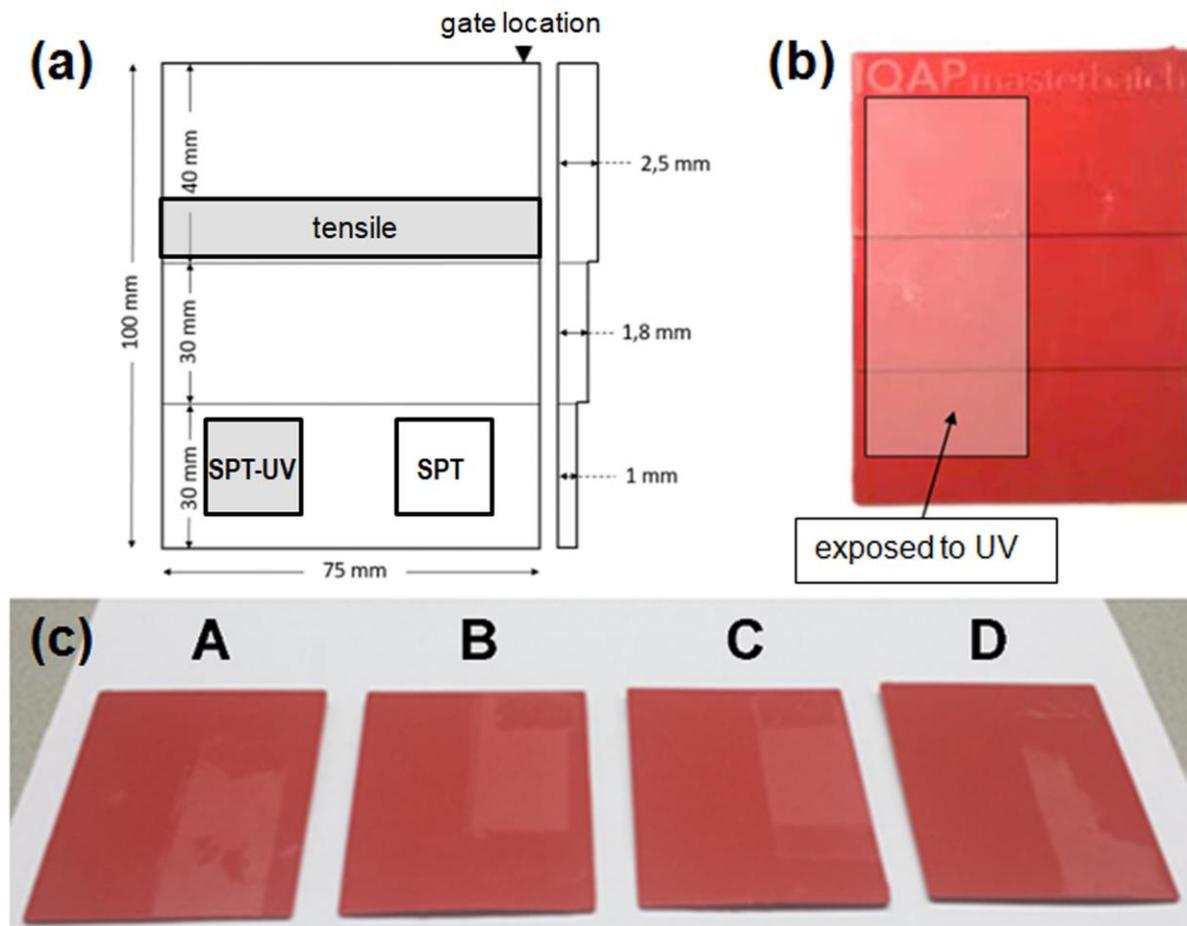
Plate dimensions and position of extracted tensile and SPT specimens (a). Photography of a plate with the indicated UV-aged zone on the back side (b). Injection moulded plates after exposure to UV radiation for 900 h (c).
